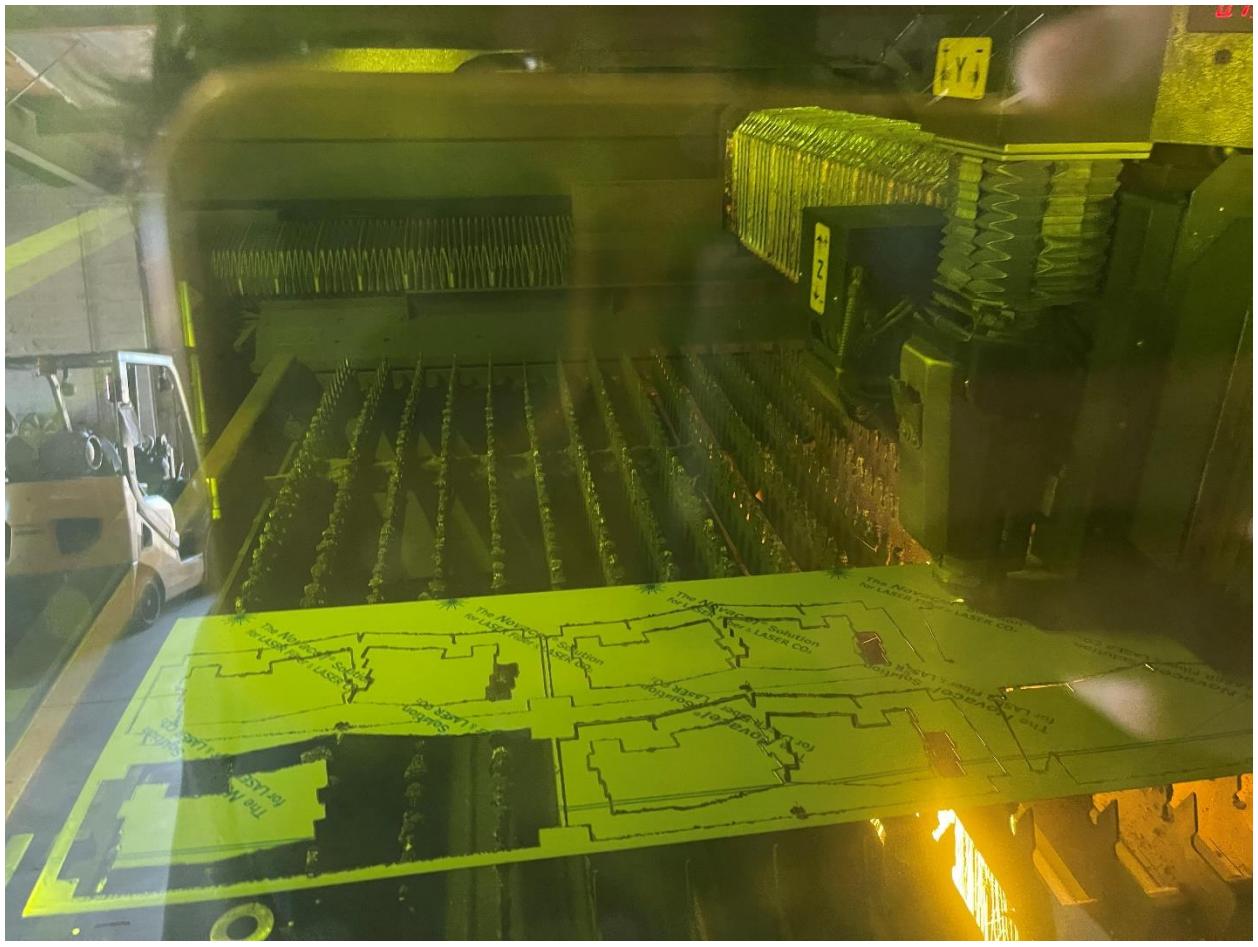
Laser machine cutting out CZ-2001 (see *Figure 2.*).
